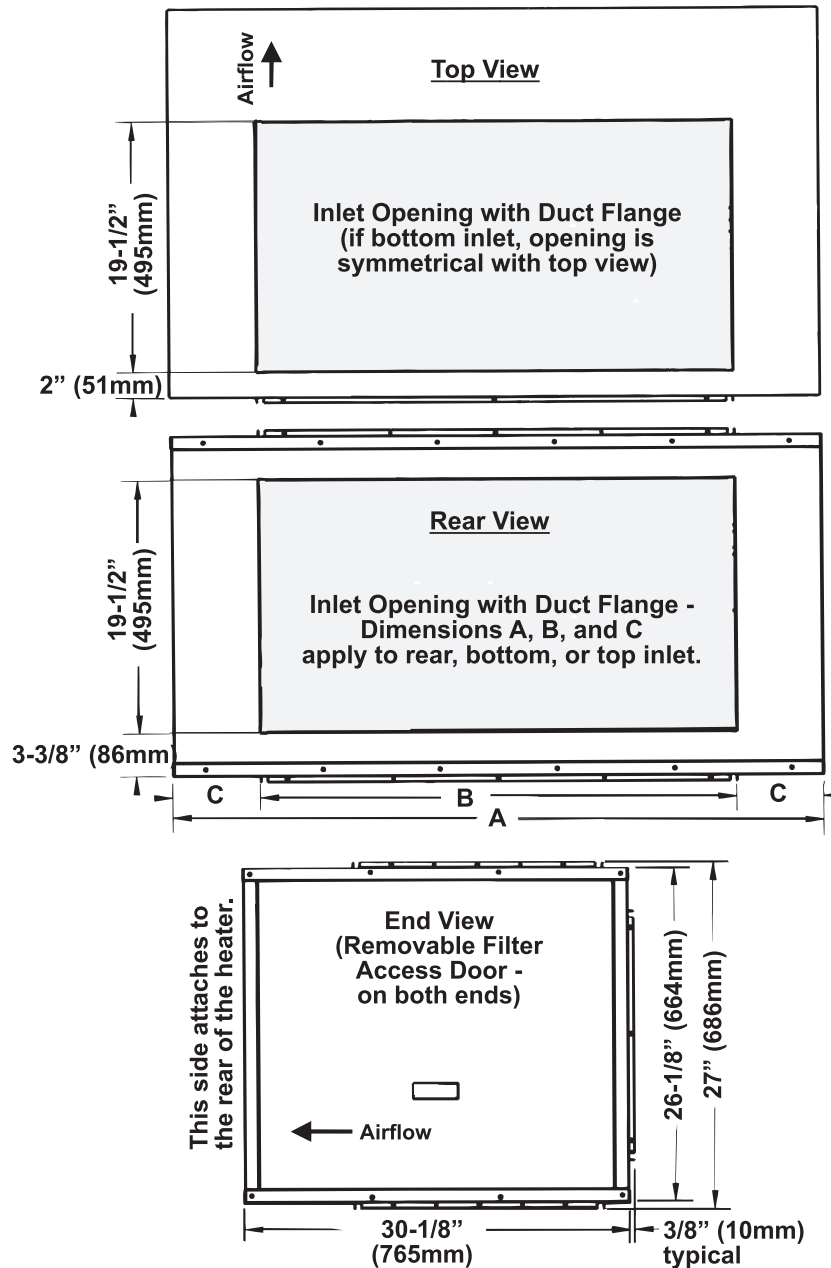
Mixing Box Dimensions (Refer to [Table 3](#))
